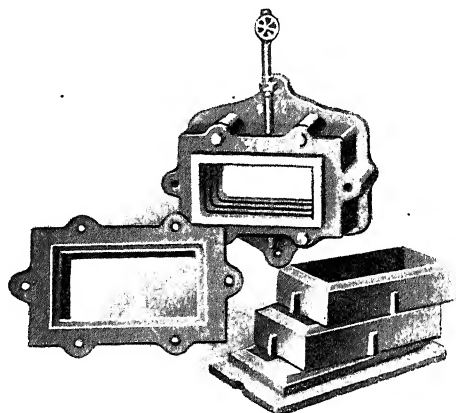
Mouthpiece—Assembled and in Pieces.
